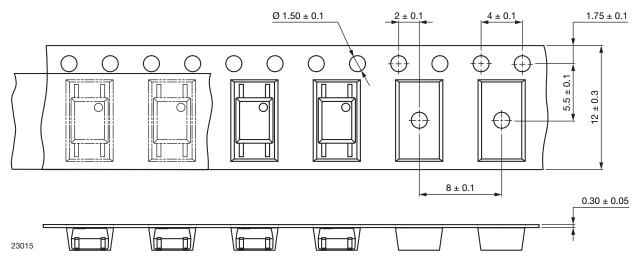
Tape and Reel Packaging (3000 pieces on reel)
